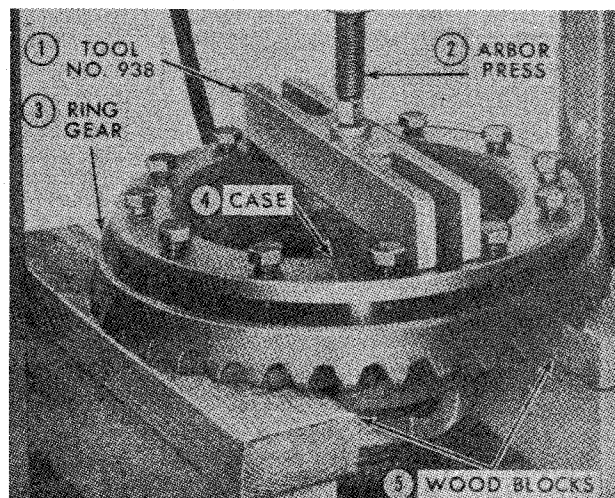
Installing bevel ring gear to differential case. Gear is aligned by installing all retaining cap screws, then case is pressed into gear.
